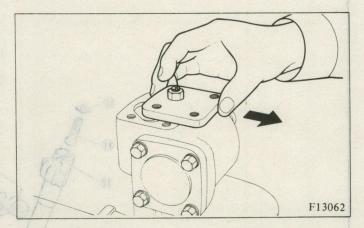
Removing the Upper Cover and Adjusting Bolt
